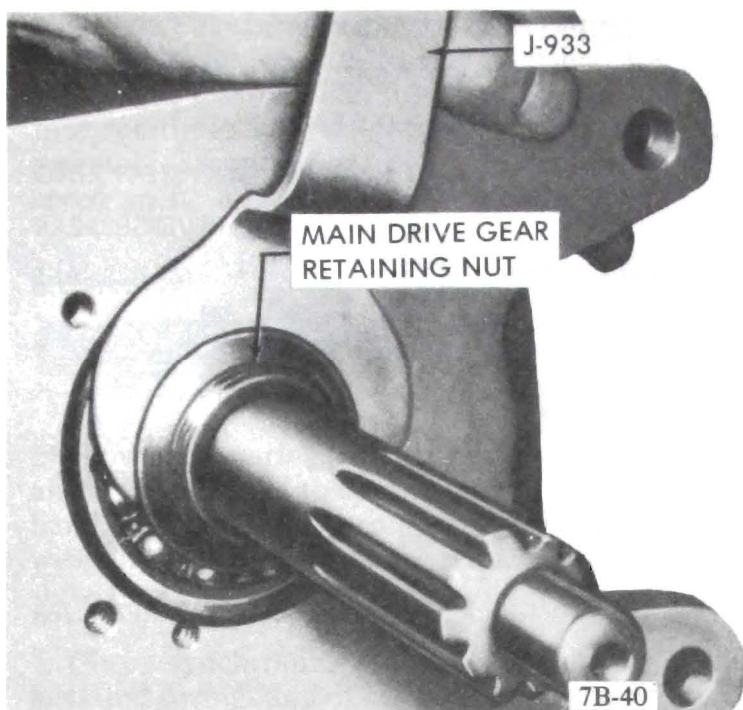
B-40 - Removing Main Drive Gear Retaining Nut
